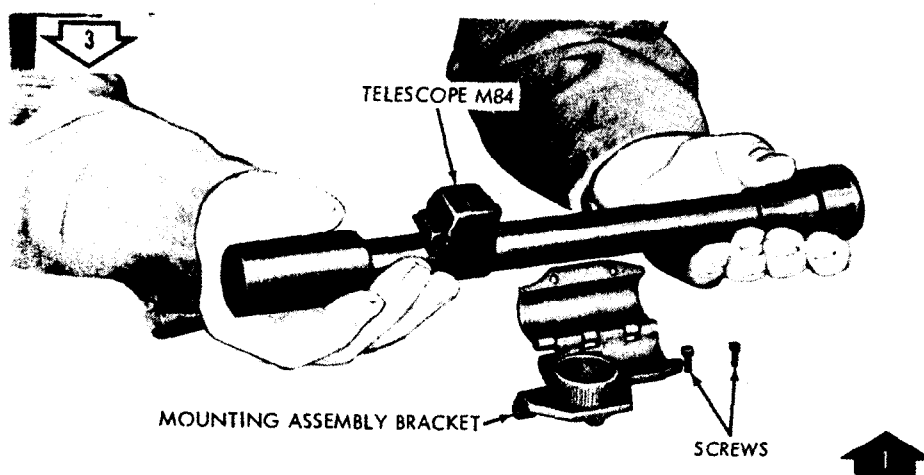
Disassembly/assembly telescope mount assembly for rifle M1C (Sniper's).
